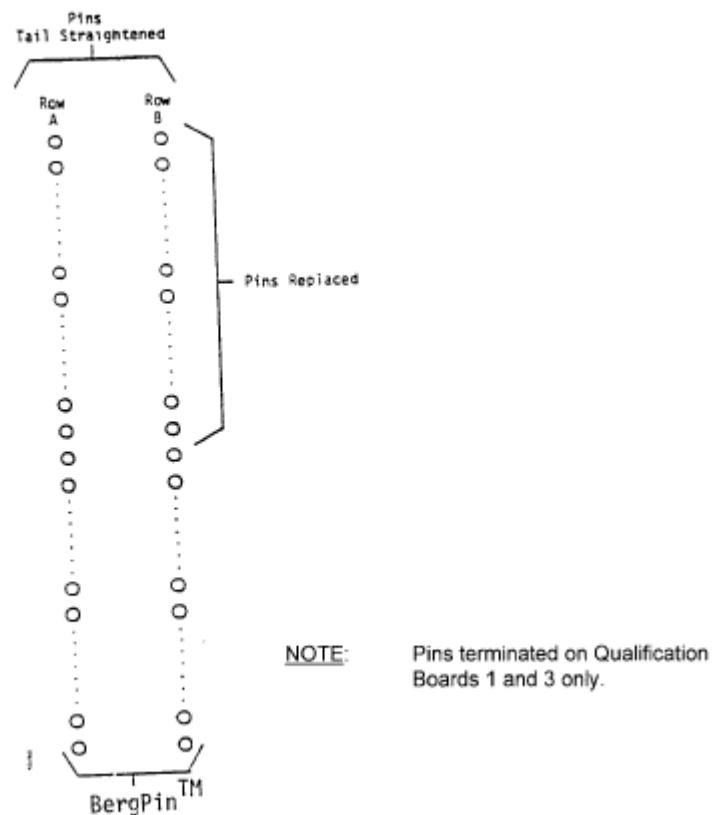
PRINTED WIRING BOARD (TEST)
